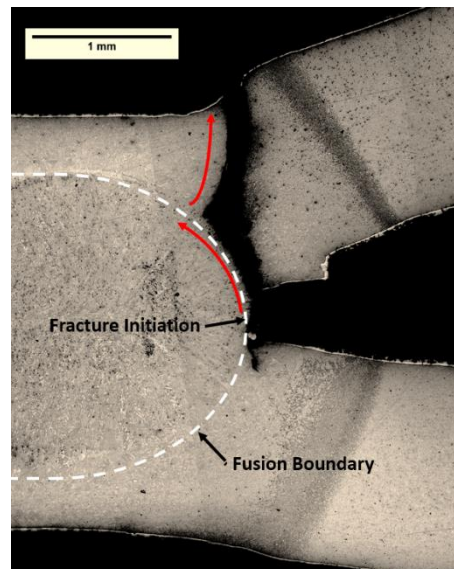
Cross tensile fracture cross-section of optimally tempered hot-stamped USIBOR weldment
